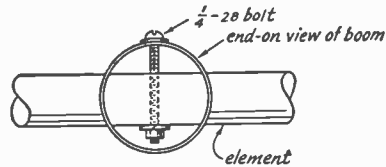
The center element section is held in the boom with a 1/4-28 machine screw, nut and lock washer. The guy wire attaches to the head of the bolt.
